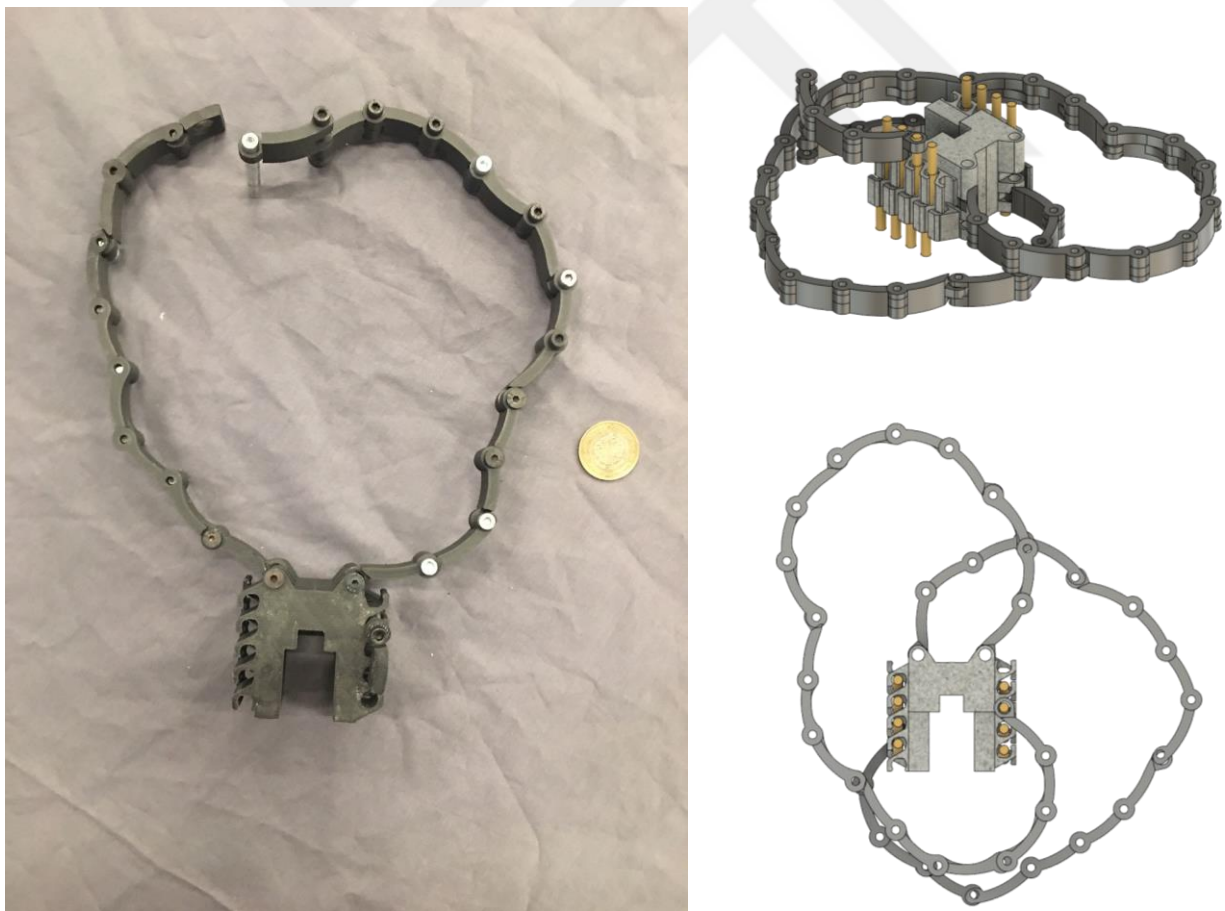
The CAD assembly (right) and the manufactured prototype of the EE-2 Constricting Chain
